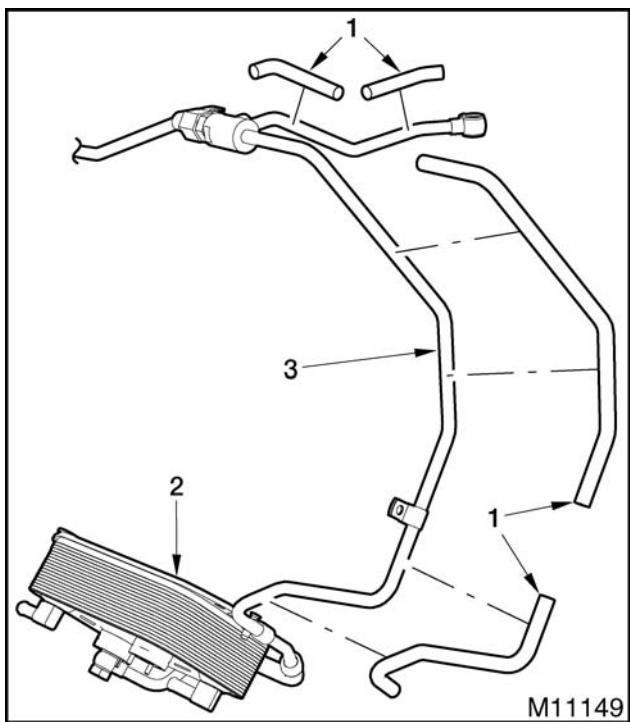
Fuel line sleeve — High-pressure pump to cooler tube assembly
